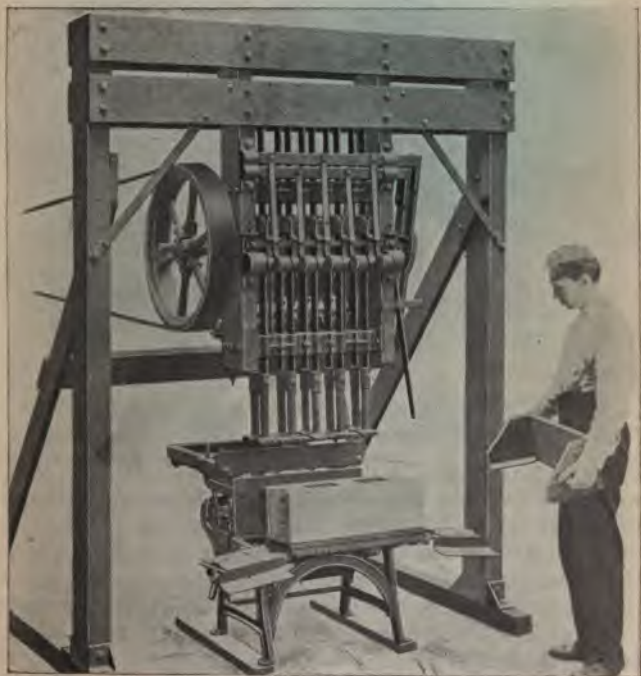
FACE-DOWN BLOCK MACHINE OPERATING UNDER POWER TAMPER; MAY ALSO BE OPERATED FOR HAND TAMPING
